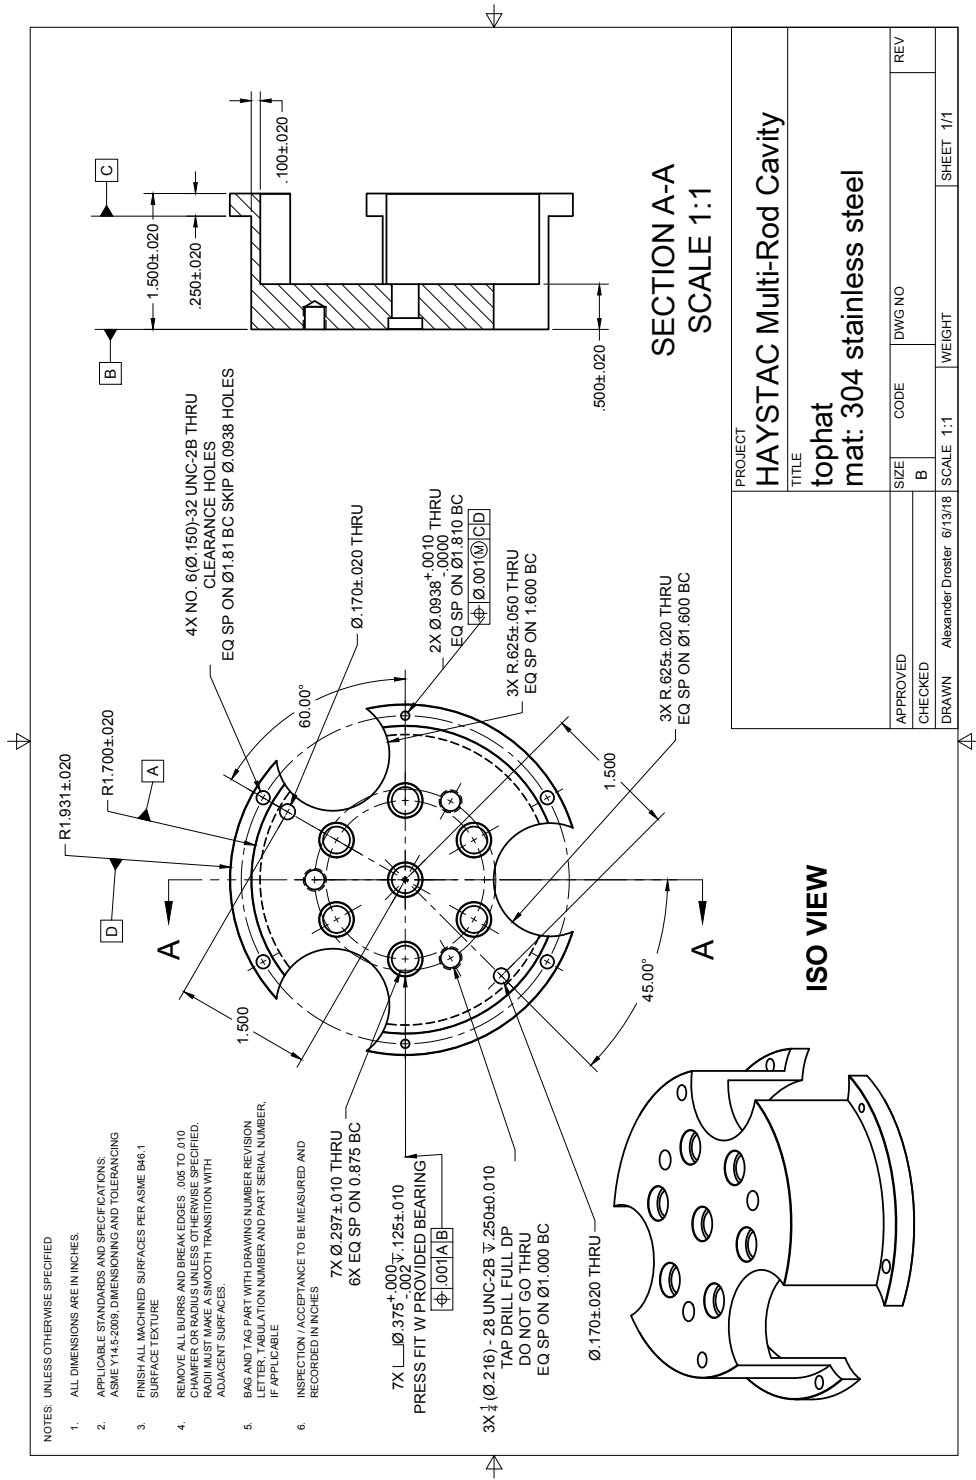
CAD drawing of the top hat in the seven-rod cavity.
